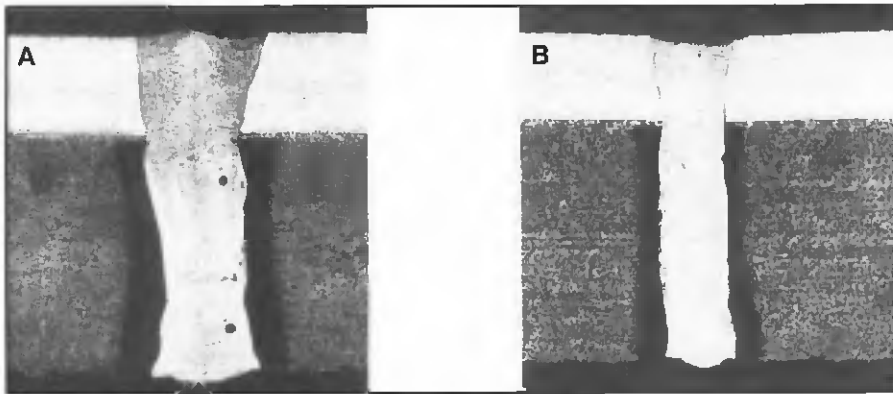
Macrographs of welded sections: A — dual LBW; B — single-side LBW.
